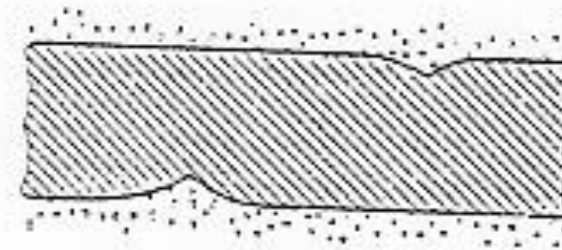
Common defects in sand castings: (f) mold shift
